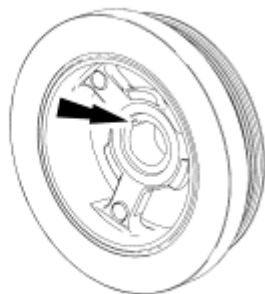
Identifying Crankshaft Front Seal Installer, Front Cover Seal Installer And Crankshaft
